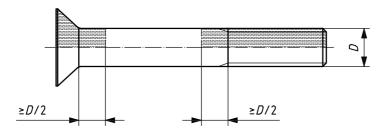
Distortion in head-to-shank fillet area (see 5.3.5)
